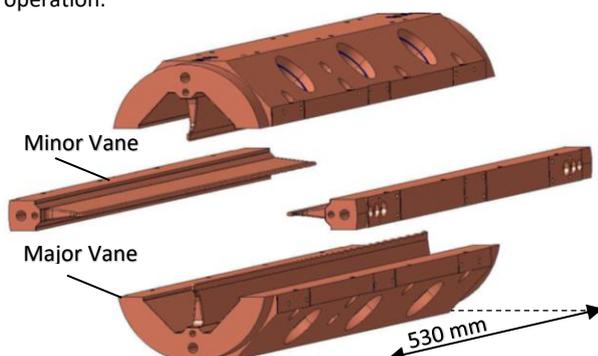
Explode view of PIXE-RFQ module assembly, two major vanes and two minor vanes.
